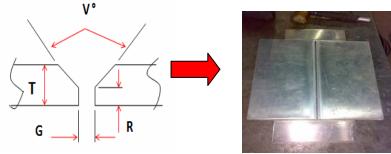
Plate Edge and Welding Joint Preparation
